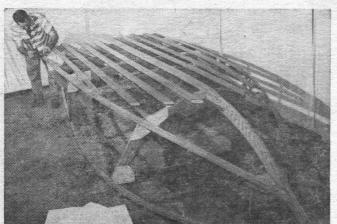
Completed framing is faired to take side and bottom planking. Horizontal cuts (kerfing) through the stringers nearest keel can be seen. Kerfing allows the stringers to bend more naturally when bottom planking is applied.
